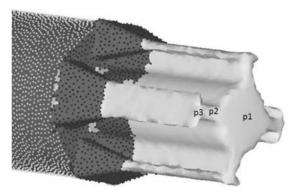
A view of the contact surface of the billet with second die شكل 14 نمايي از سطح تماس بيلت با قالب دوم
